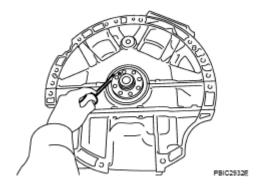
Removing Rear Oil Seal Using Tool Courtesy of NISSAN MOTOR CO., U.S.A.
